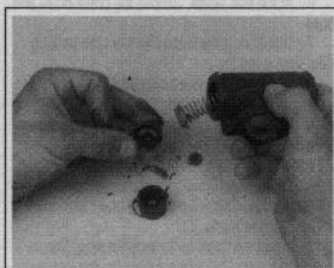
Remove the pistons, cup seals and spring from the cylinder
